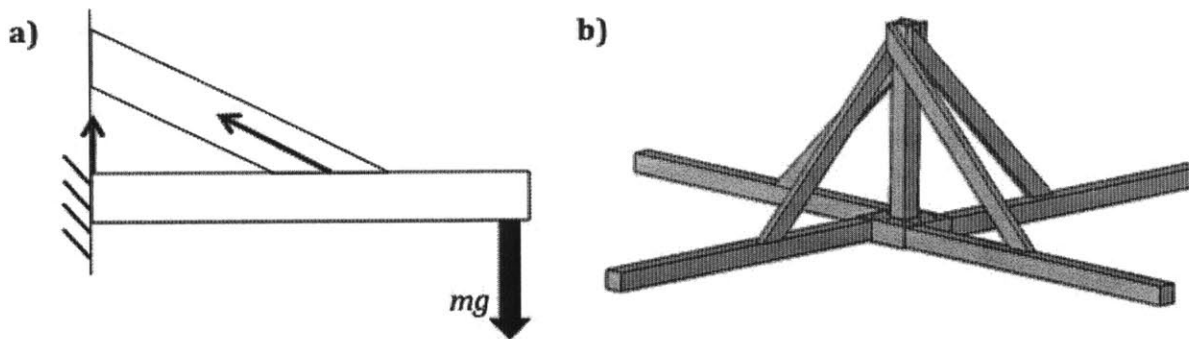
(a) Diagram of a single cantilevered beam with top support; (b) CAD model of 4 top-supported cantilevered beams in a swing ride assembly.
